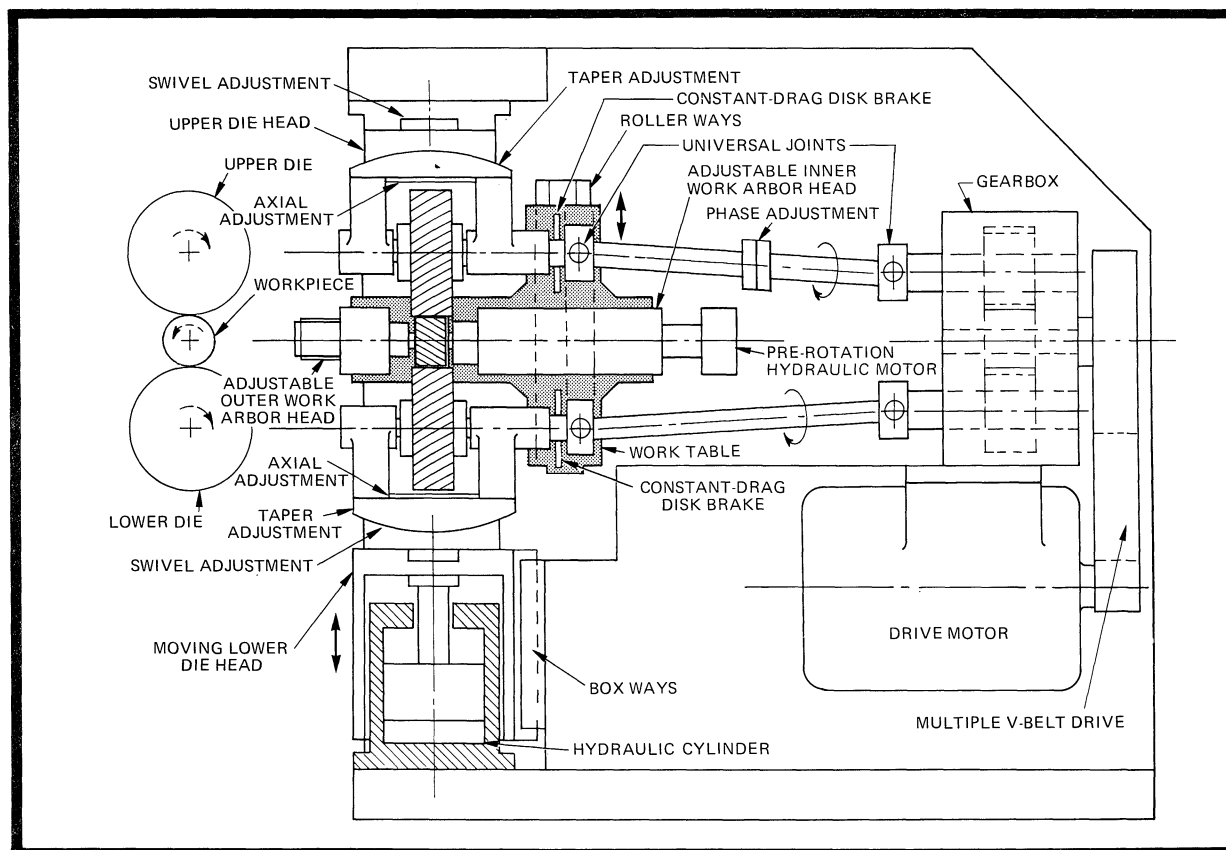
Operating components of a double-die gear roll-finishing machine.
